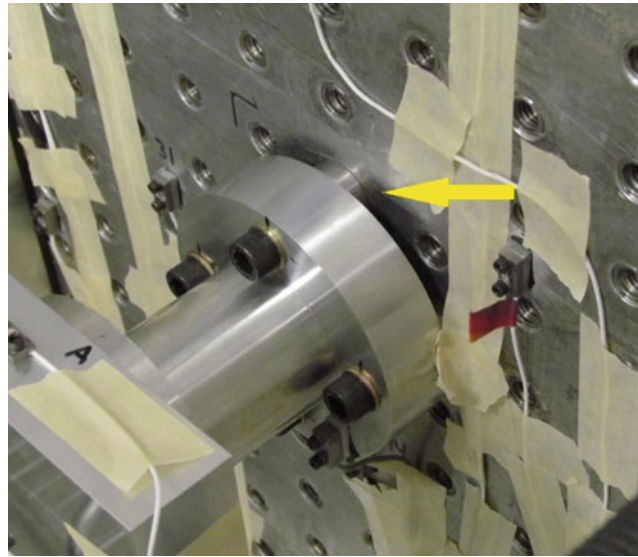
A precision steel spacer (yellow arrow) installed between the cylindrical fixture and the resonant plate. In the future, this linearization of the physical system could be integrated into the machined surface of the fixture via a boss
